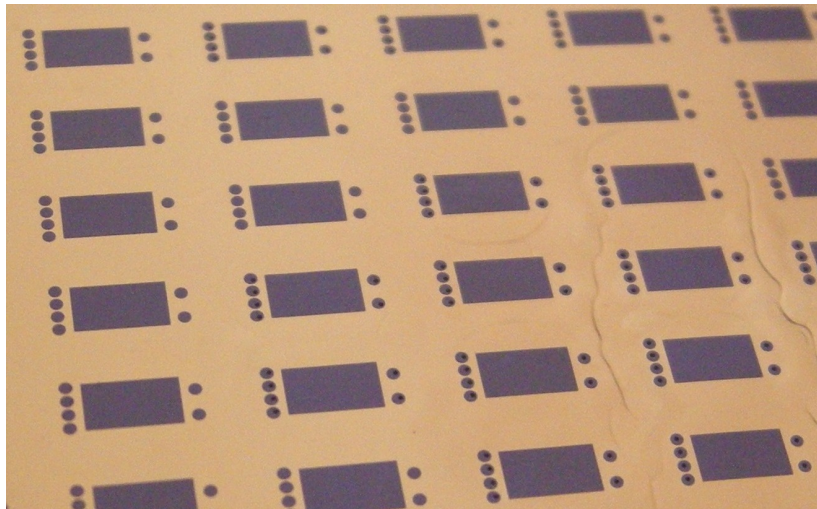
Top view of the through holes after electroless and galvanic Cu plating process
